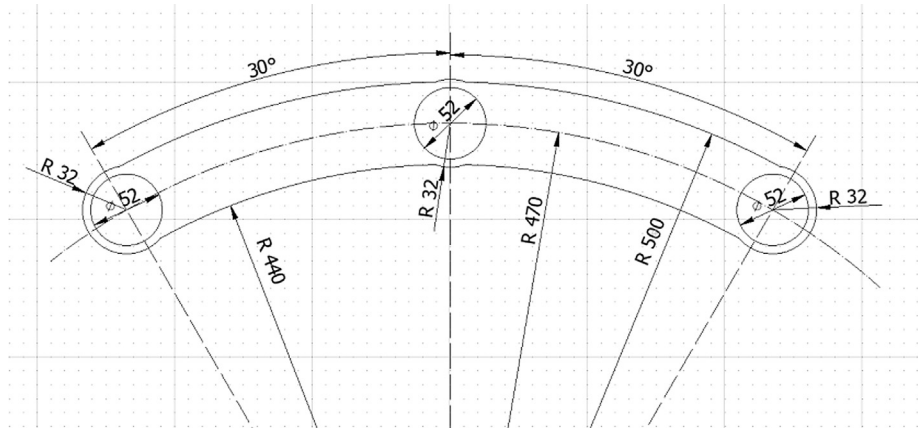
SLAT extension mechanism bracket overall dimensions.
